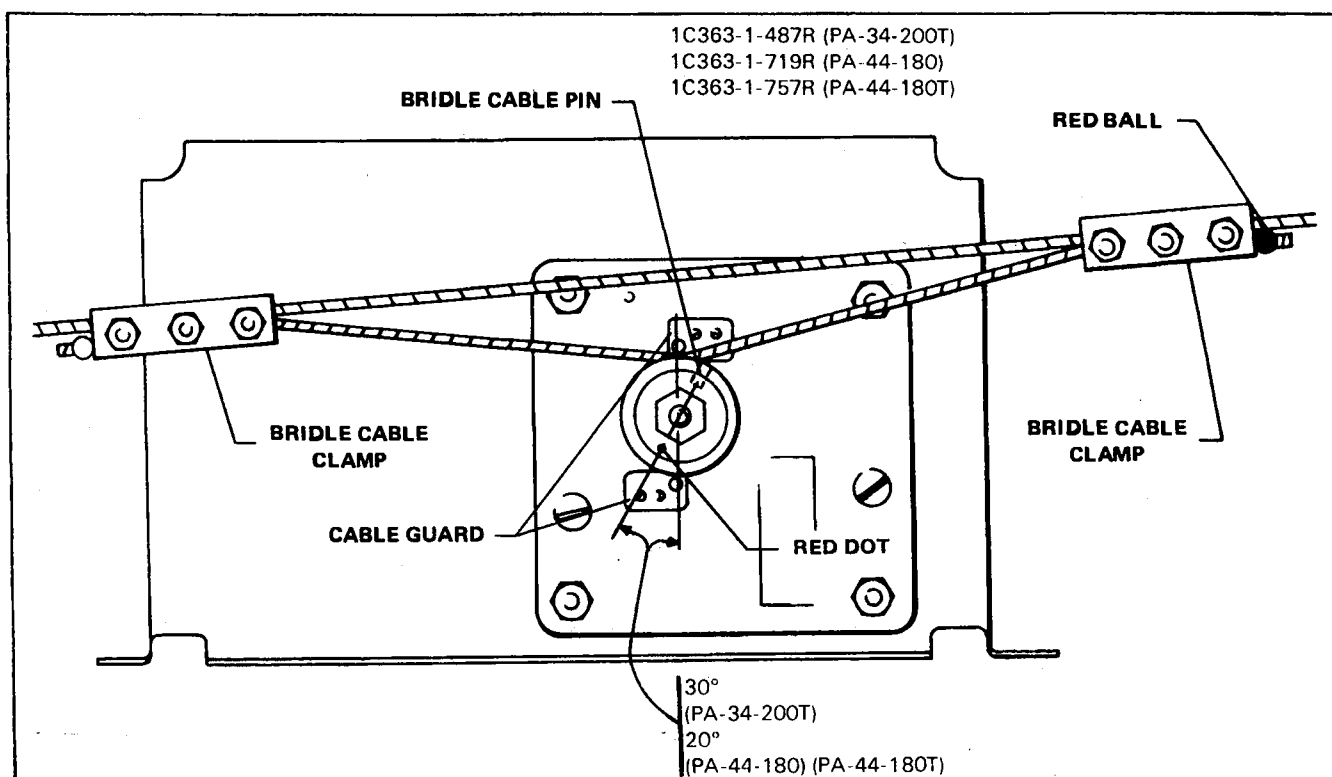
Roll Servo Installation, PA-34-200T, PA-44-180 and PA-44-180T (AutoControl III B)
